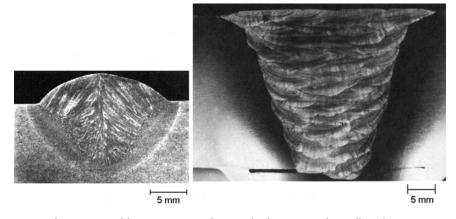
Types of welds. Source: Ref 1.1
